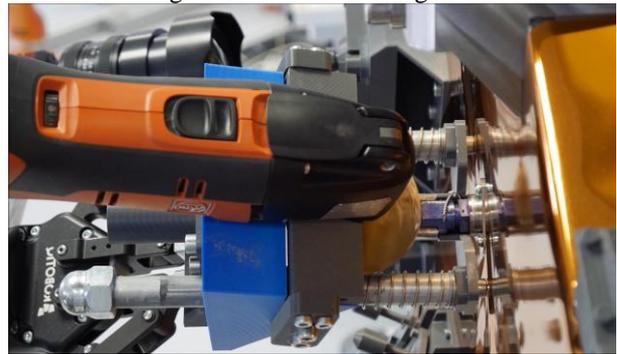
The wire cutting in operation. The guiding frame has been put around the valve, and the saw blade is closing in towards the wire.
